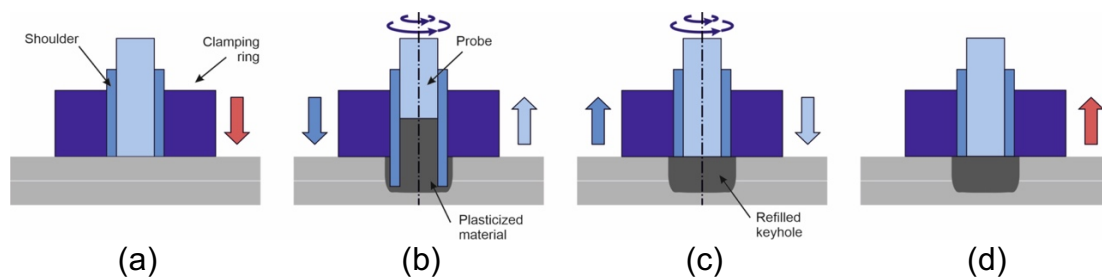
Refill Friction Stir Spot Welding process, schematically illustrated in steps.
